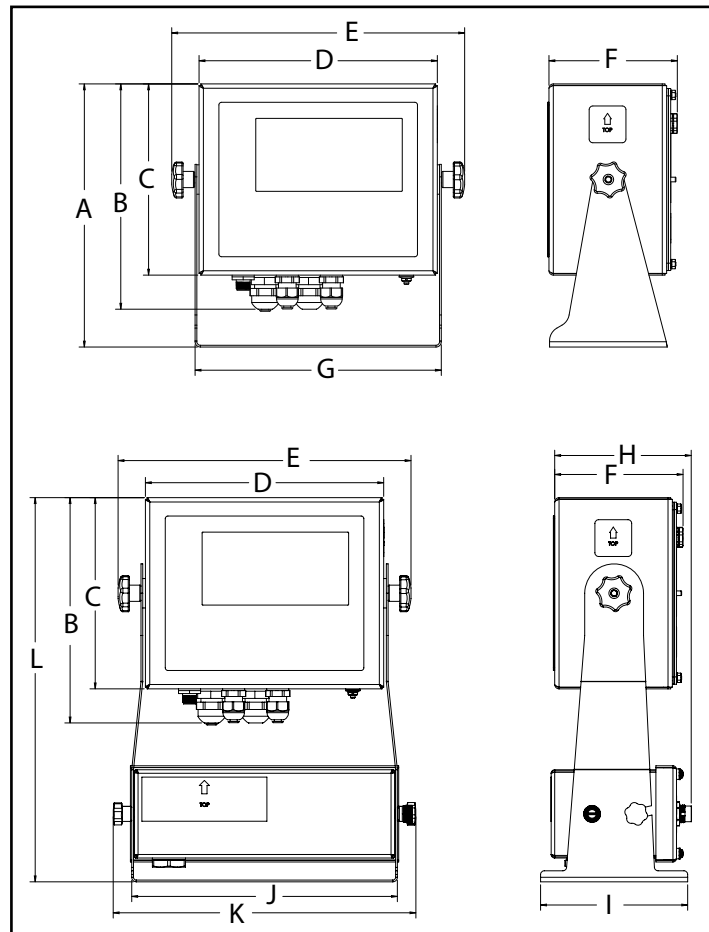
Product Dimensions (Universal and Optional Battery Versions Shown)
